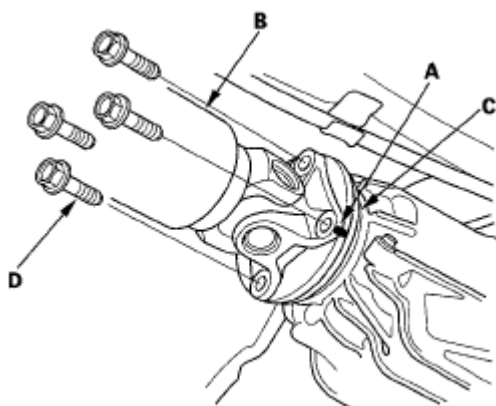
Making Match Mark On Propeller Shaft And Rear Differential Companion Flange
